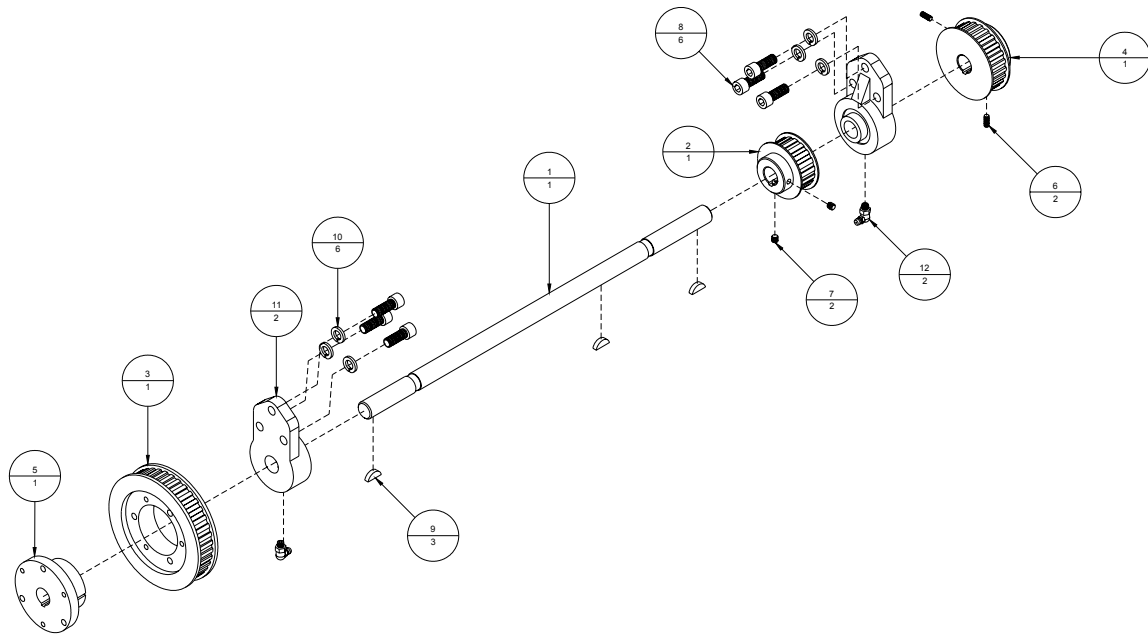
Transport Driveshaft Assembly (100601A)
